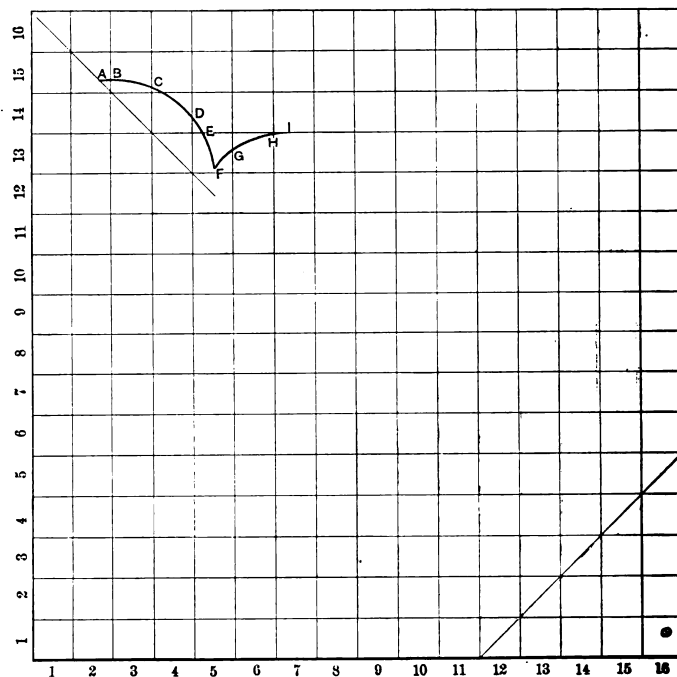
Method of Transferring the Design to a Block of Wood.
